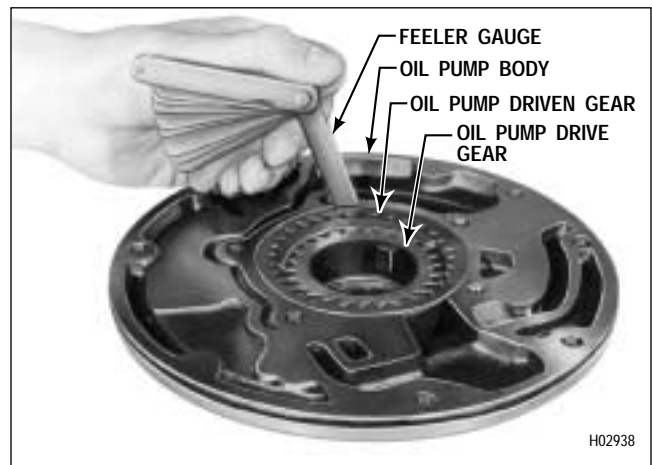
Checking Diametrical Clearance of Oil Pump Driven Gear
